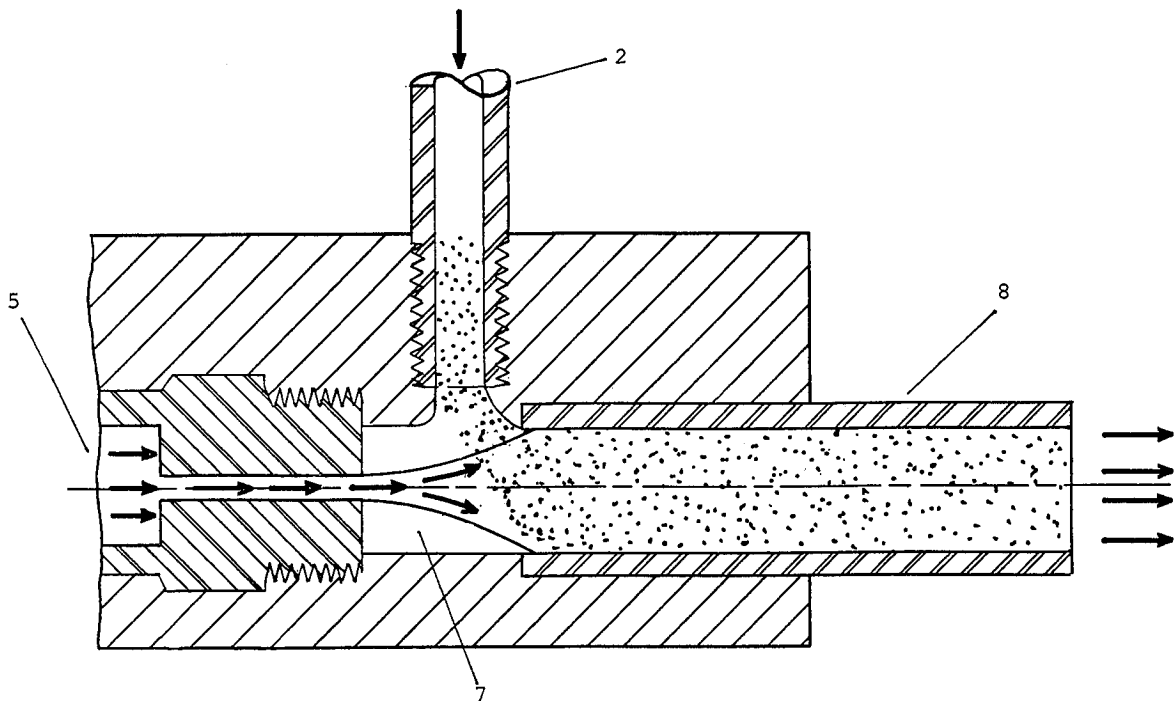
Cutaway View of Abrasive Jet Cutter.
